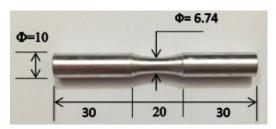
Dimensions of fatigue test specimen in (mm) according to standard specification of (DIN 50113).
